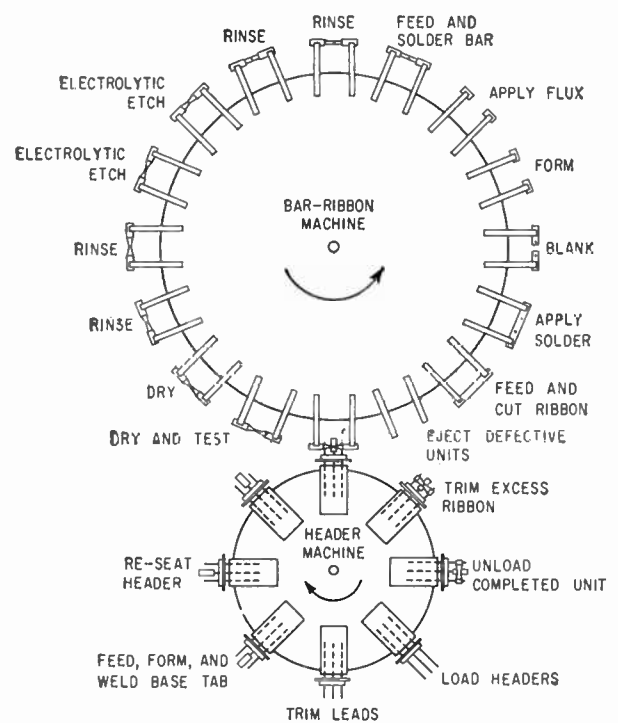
Sequence of operations performed on bar-ribbon and header assembly rotary index tables
